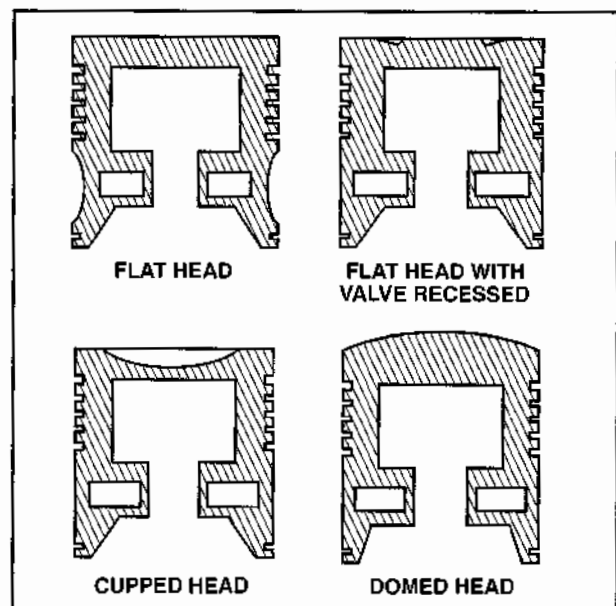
The majority of modern aircraft engines use flat-head pistons; however, other designs are still in service.
